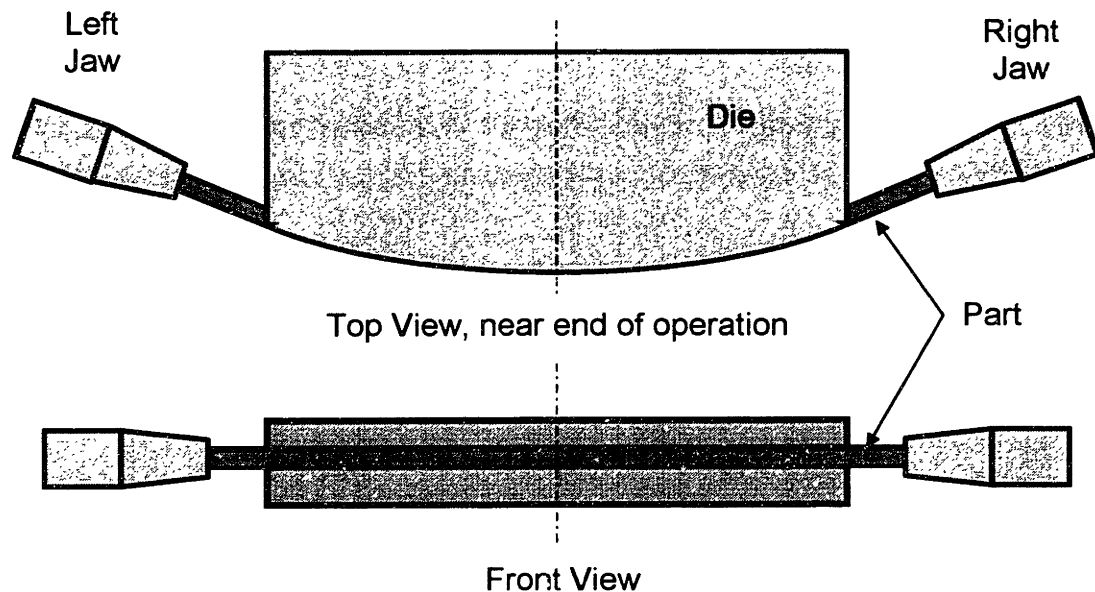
Top and front views of extrusion stretch forming die, part, and jaws
